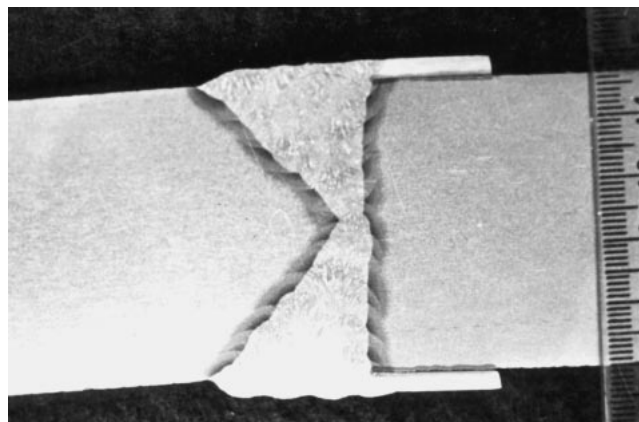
Macrography of the welded joint. Etching with Nital 2
